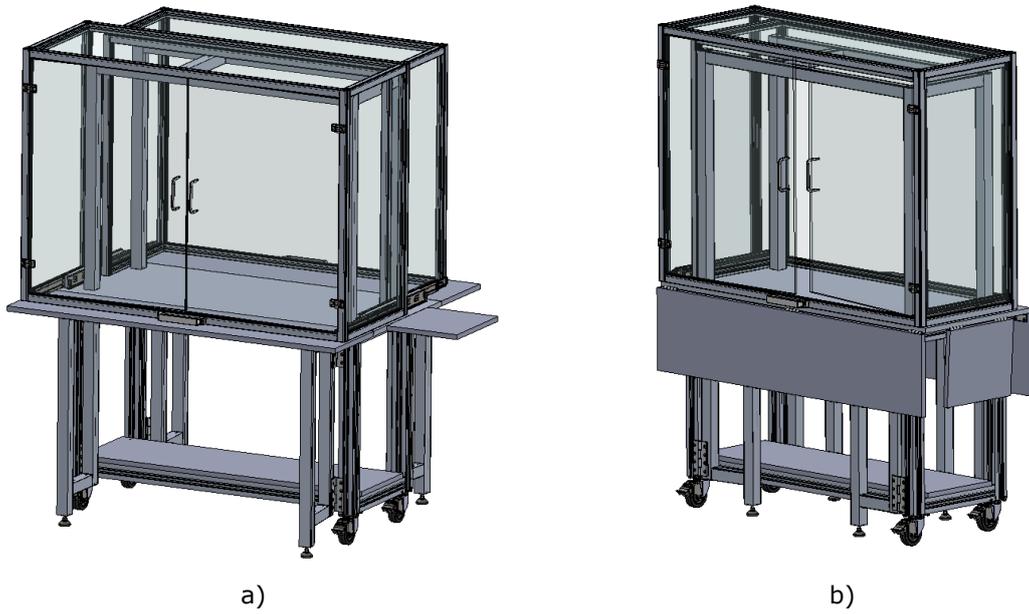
Final design where a) Full opened test bench, b) Closed test bench
